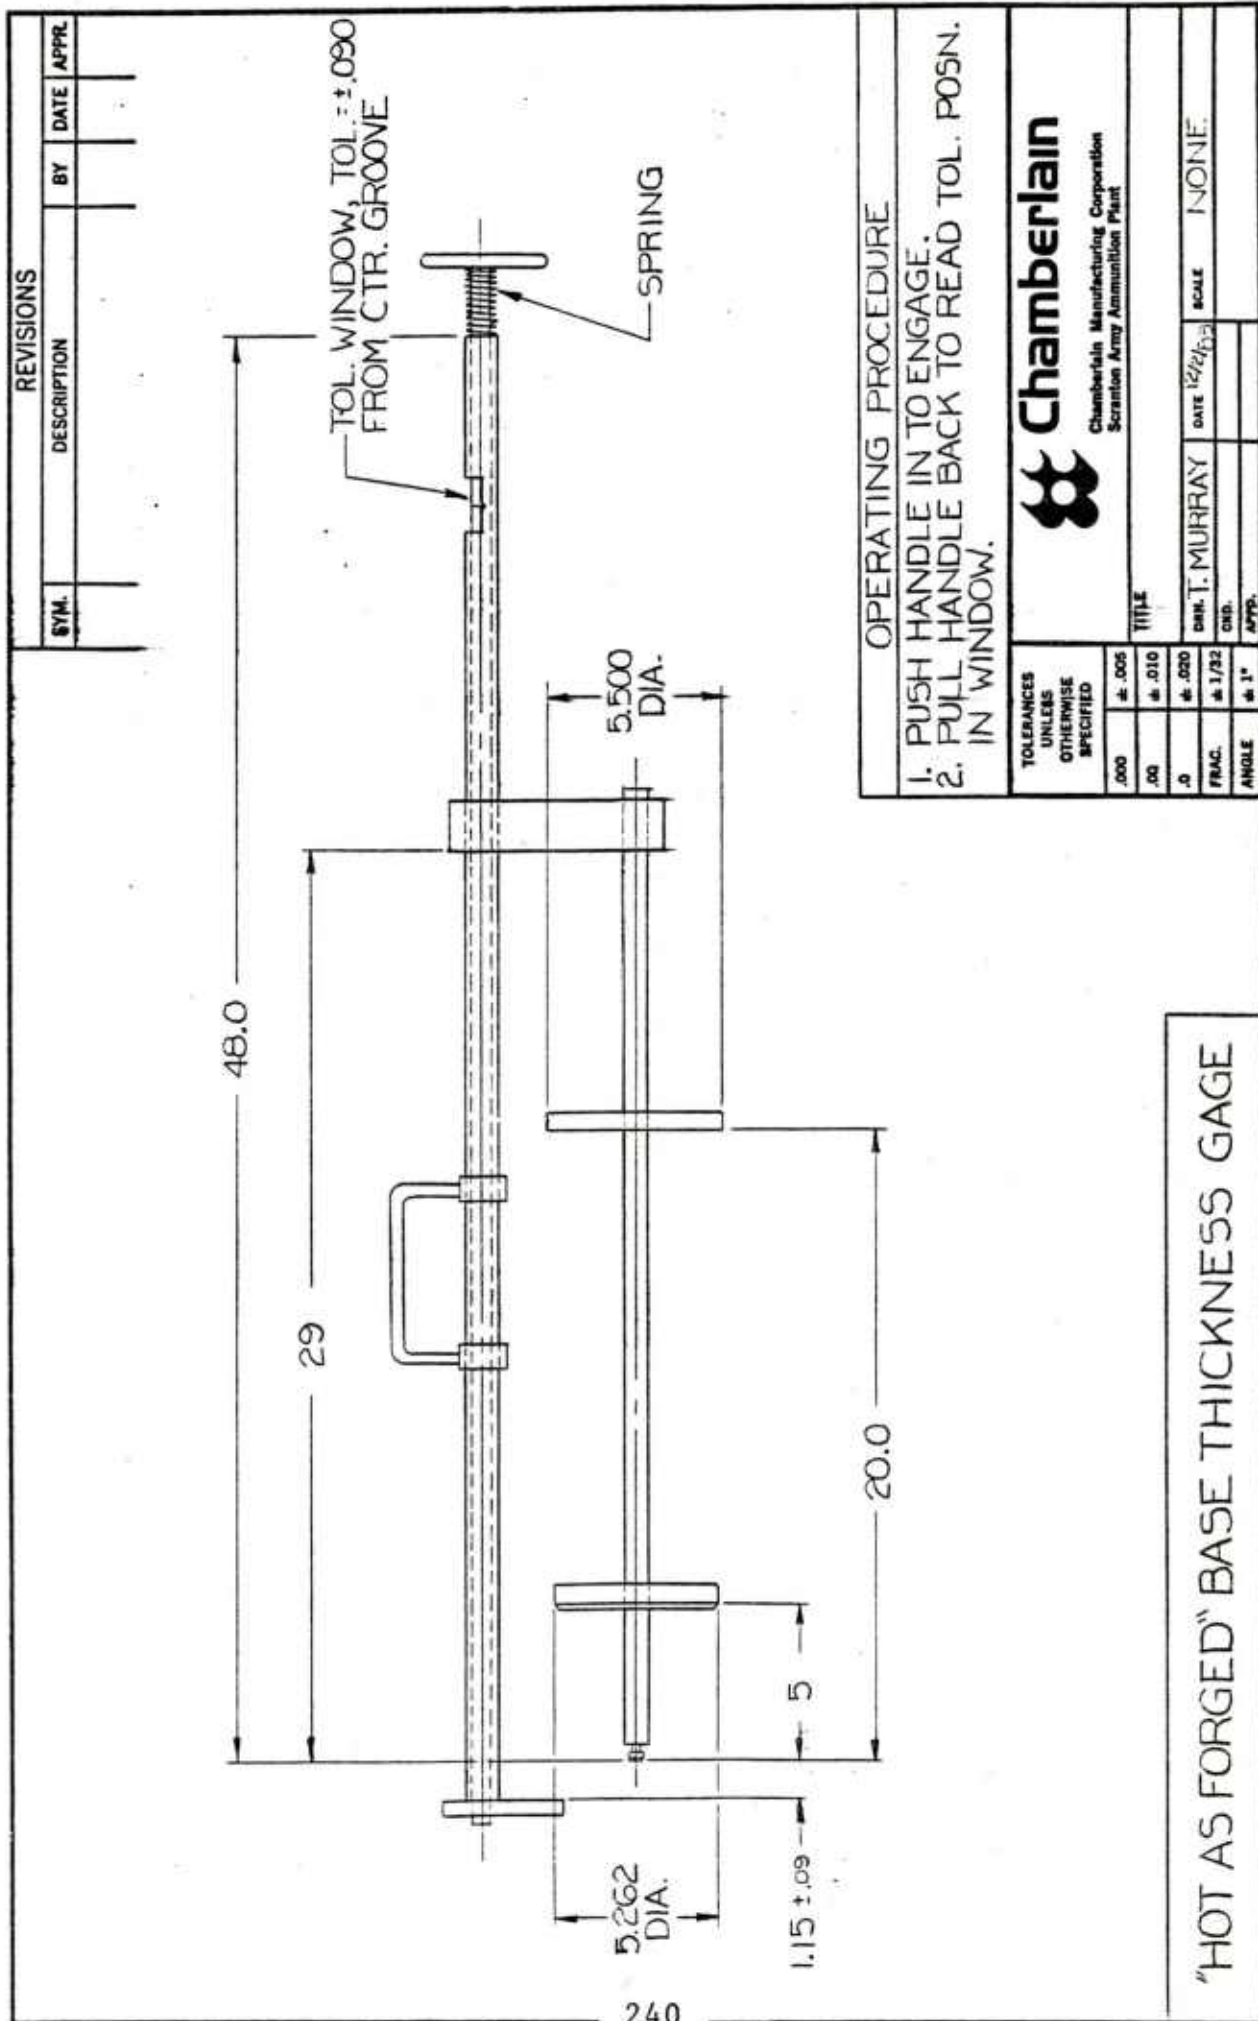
Base thickness gage utilized for the inspection of the "hot" forgings.
